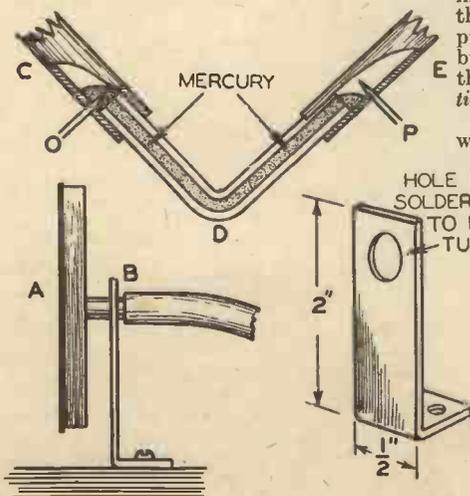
Details of the operating switch and support for the rubber tube to the gas chamber.
